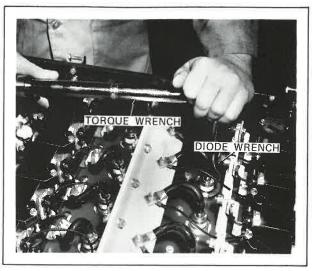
TORQUING DIODES ON TYPICAL PANEL.
